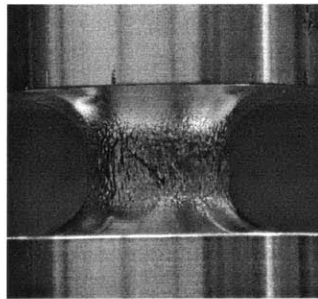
A deformed new compression specimens showing crack formation at the surface
